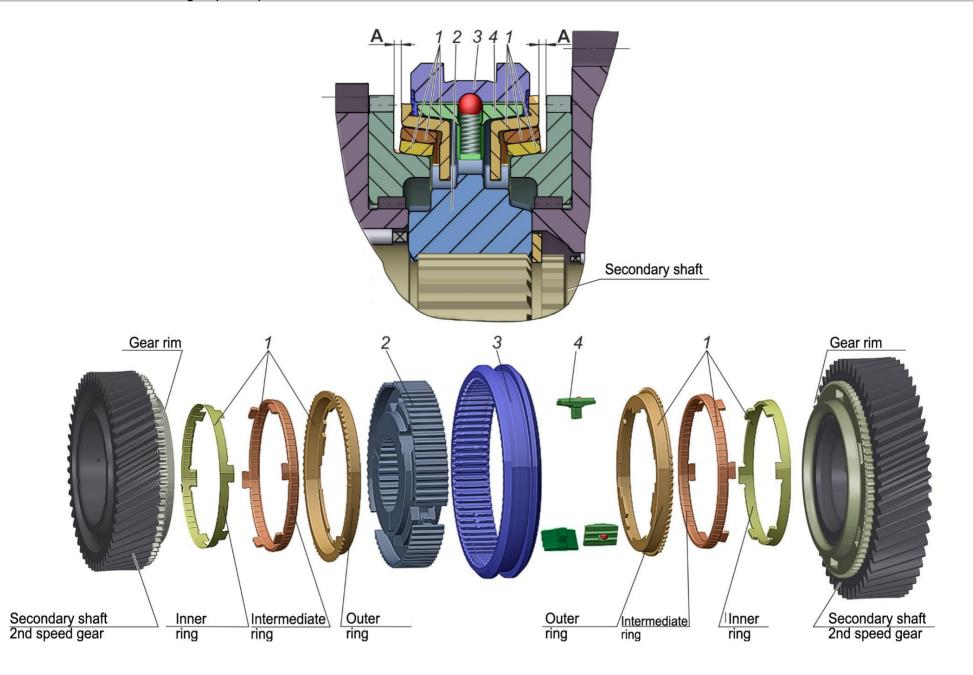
1st and 2nd speed synchronizer: A = 1.0-2.2 mm; 1 – 1st and 2nd speed synchronizer locking ring set; 2 – synchronizer hub; 3 – synchronizing sleeve; 4 – synchronizer T-block.
